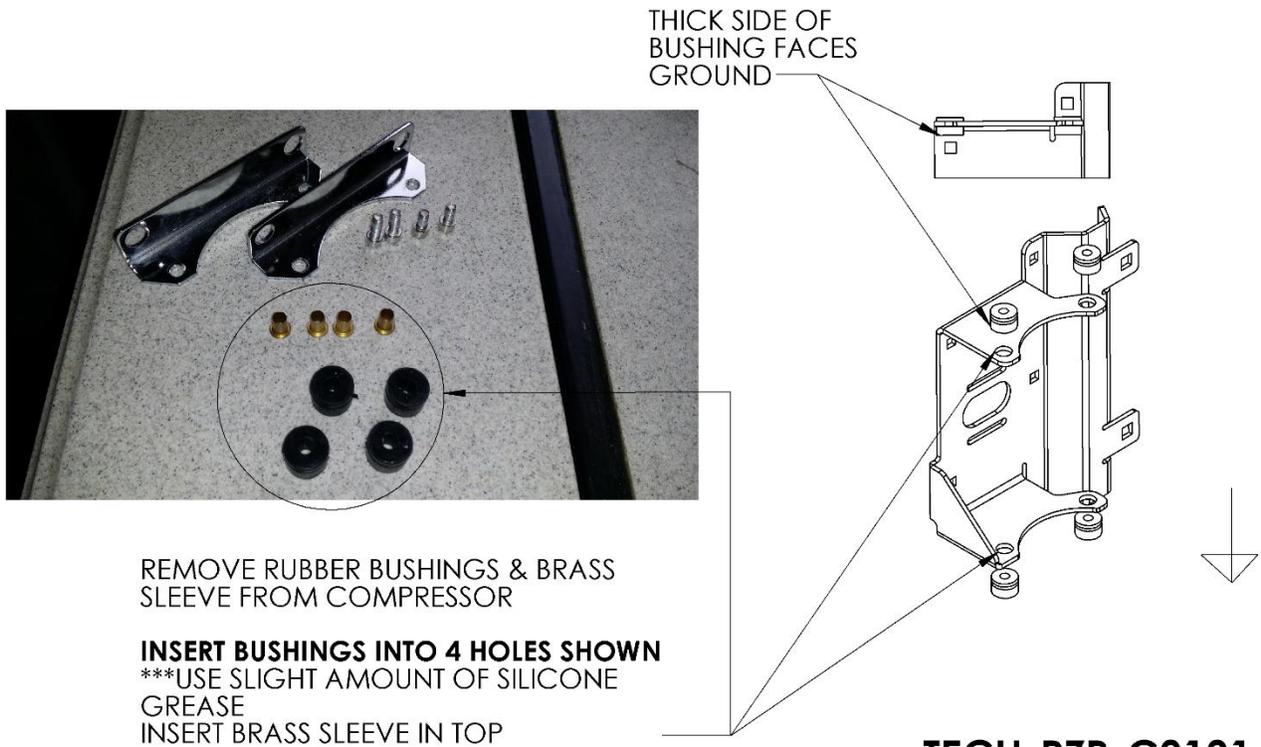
Air Compressor Bracket with Rubber Grommets Installed
